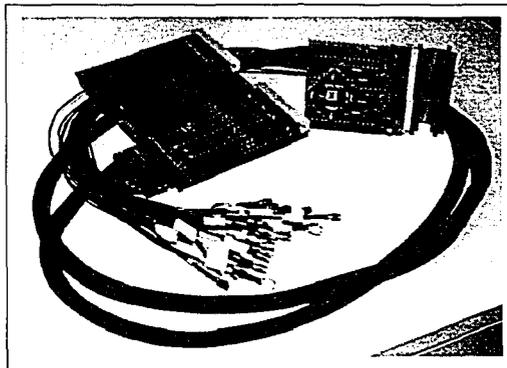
Complete speed-wire motherboard/daughterboard assembly with connectors and cable assembly.
